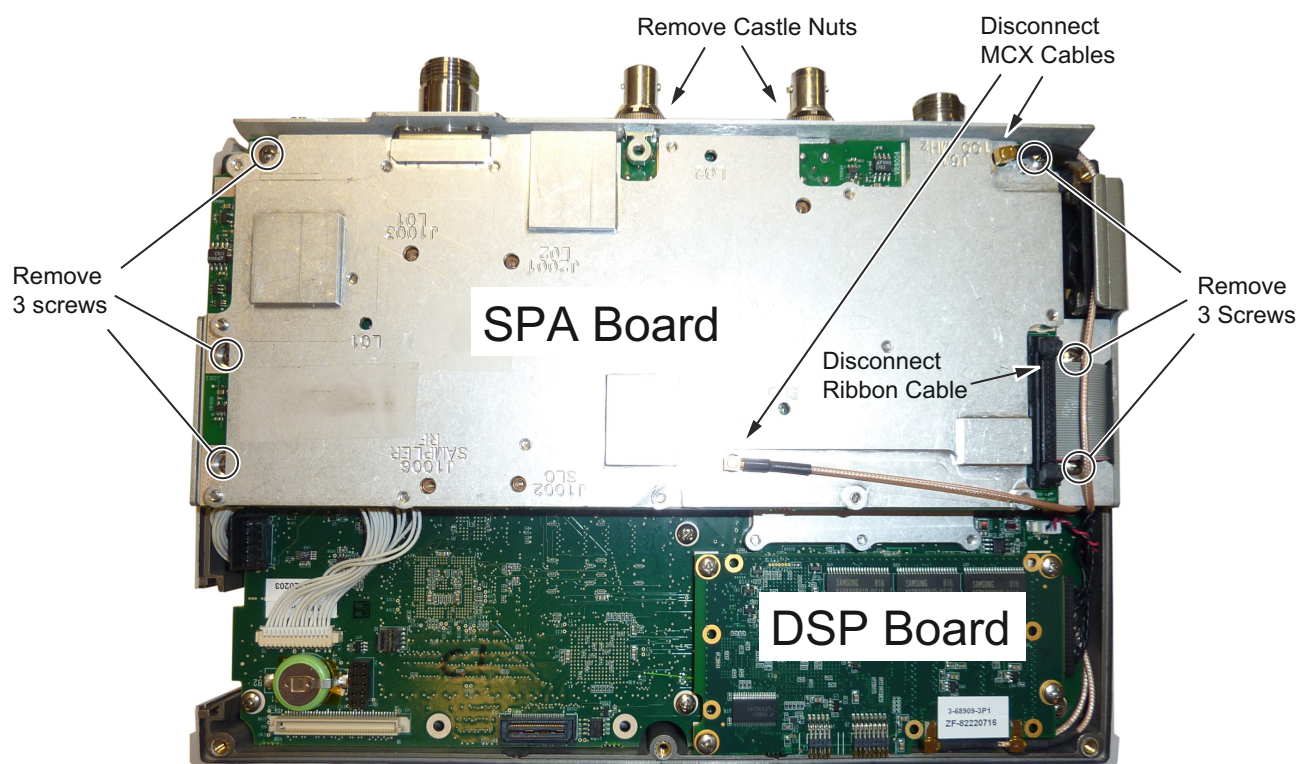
Removing the PCB Assemblies out of the Case
